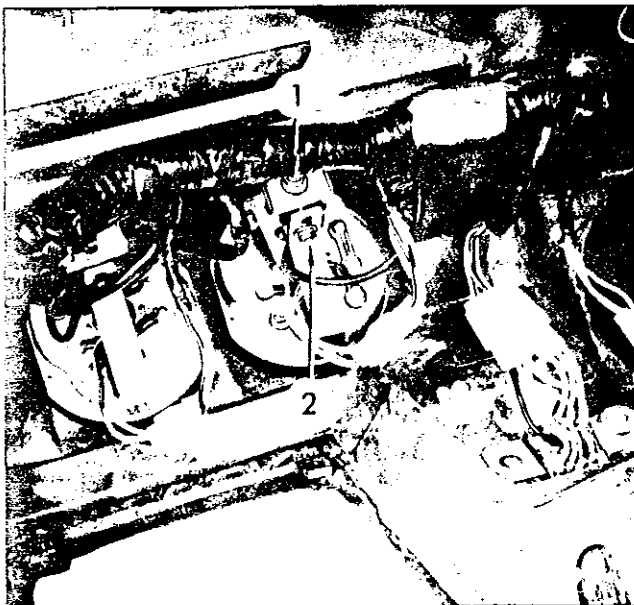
Removing water temperature gauge and oil pressure gauge
